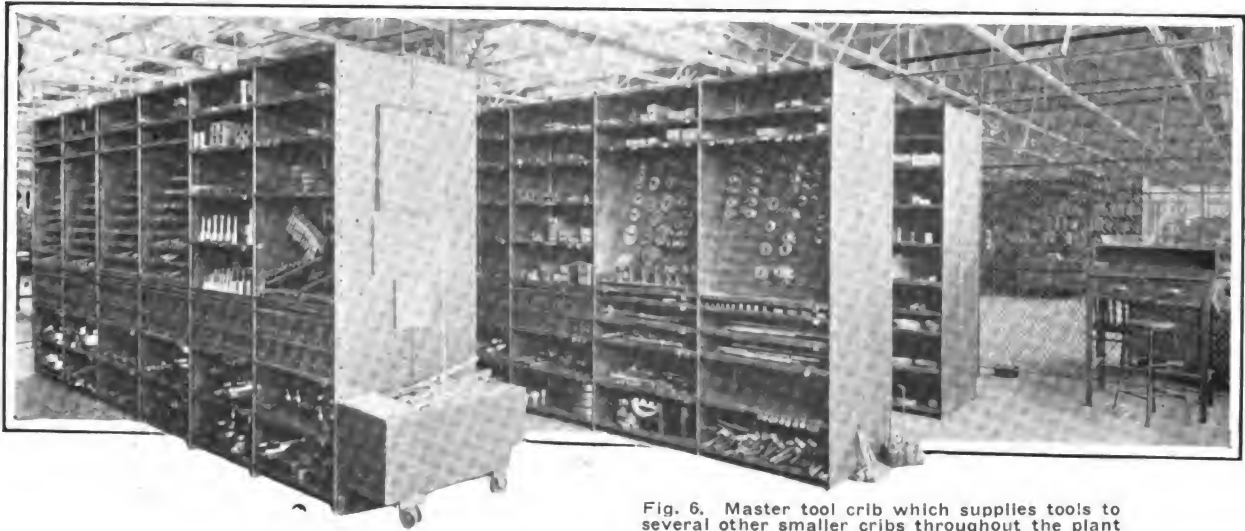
Master tool crib which supplies tools to several other smaller cribs throughout the plant
